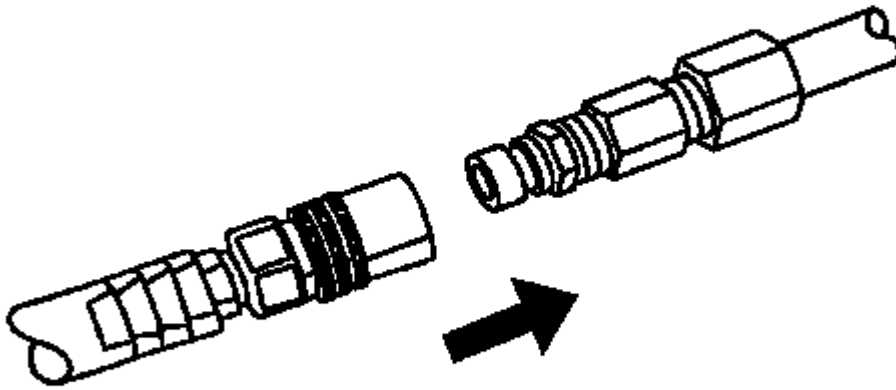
Attaching Extraction Hose To Vacuum Hose
